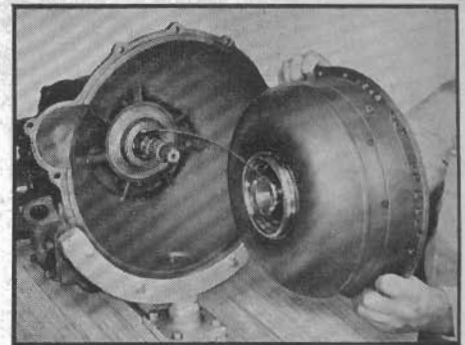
Aligning primary pump with front pump drive lugs. 1950-52
